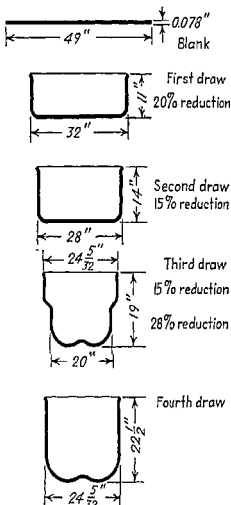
Draw reductions for a large stainless-steel shell.³
